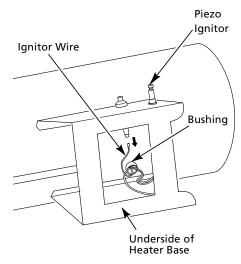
Removing Ignitor Wire From Piezo Ignitor
